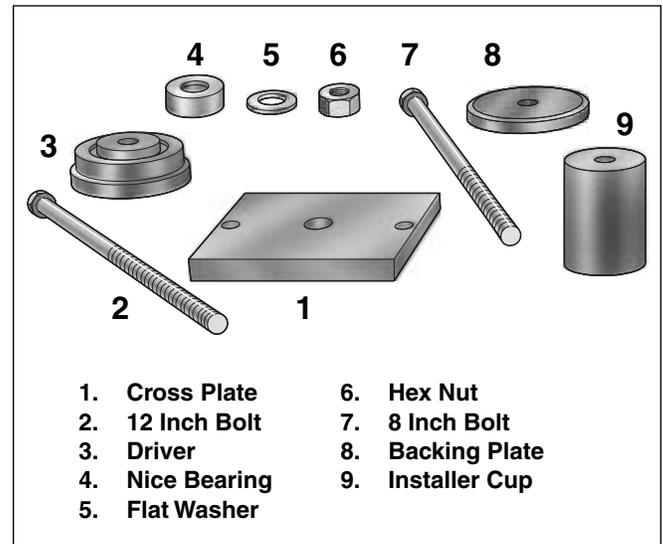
Main Drive Gear/Bearing Remover/Installer (Part No. HD-35316B)
